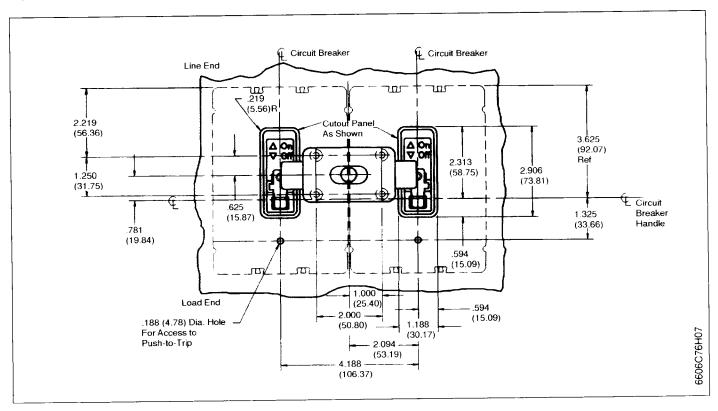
F-Frame Sliding Bar Interlock Installation Details
